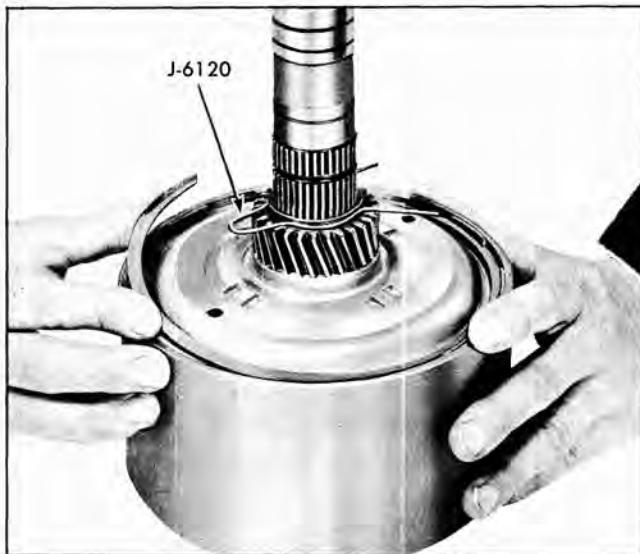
Installing Output Shaft and Reverse Drive Flange Snap Ring
